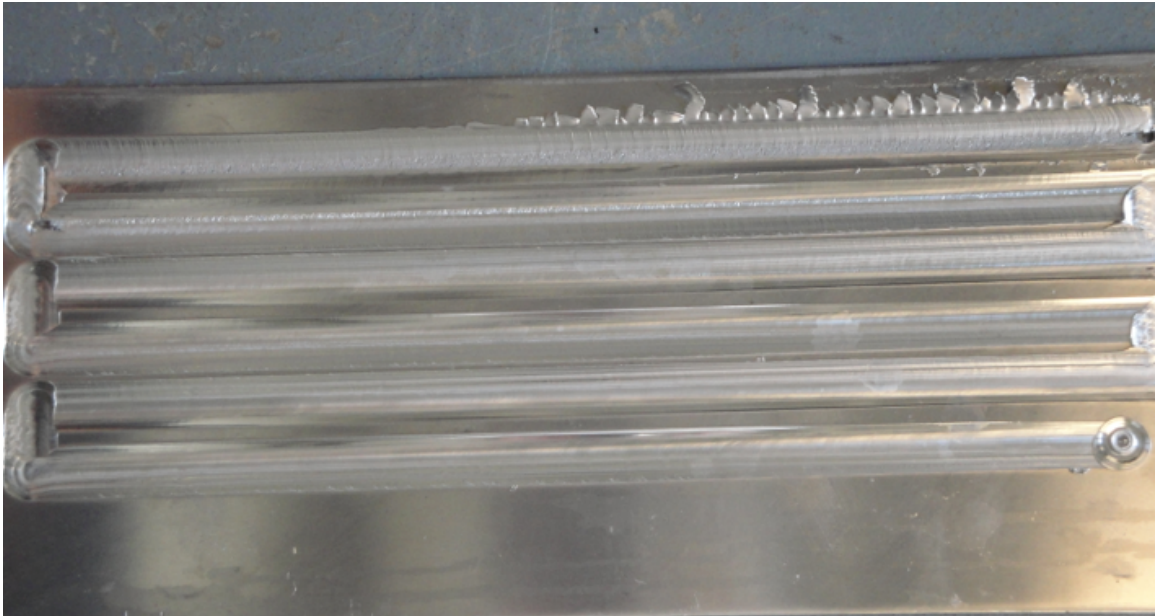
Weld of Al 359/SiC/20p with spherical tool. Weld is 9 feet in length and divided into six 18" linear passes. A 1" lateral movement is used to reposition the tool between passes.
